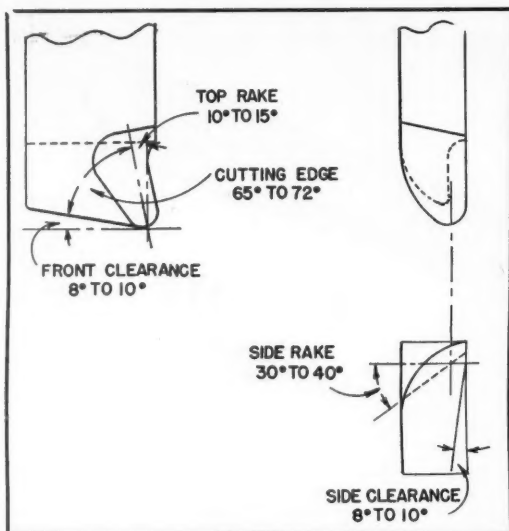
Drawing of Finishing Tool for Use in Machining Aluminum
